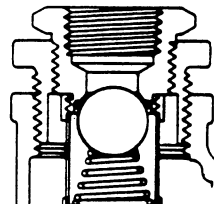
Vertical installation in top outlet of tee, showing use of reducing bushing.
